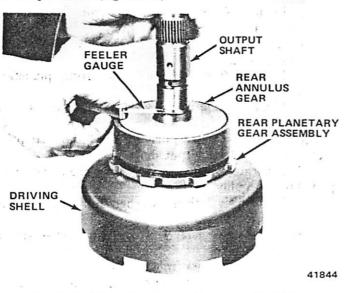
C-83 Measuring Planetary Gear Assembly End Play
